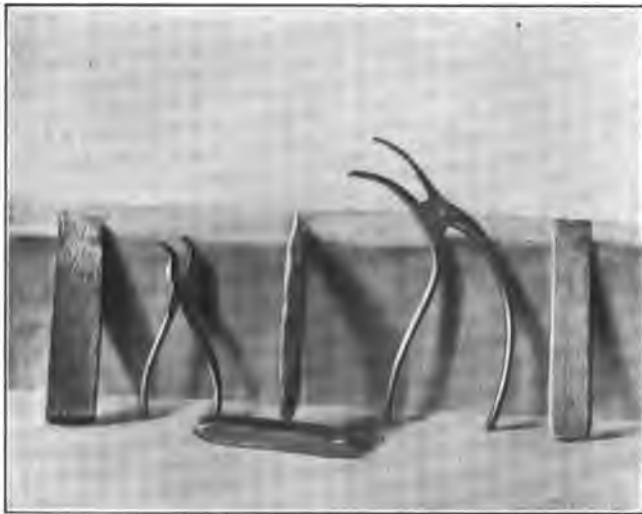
Spinners' Pliers which are used for turning the Edge of the Metal when making a Large Bend
